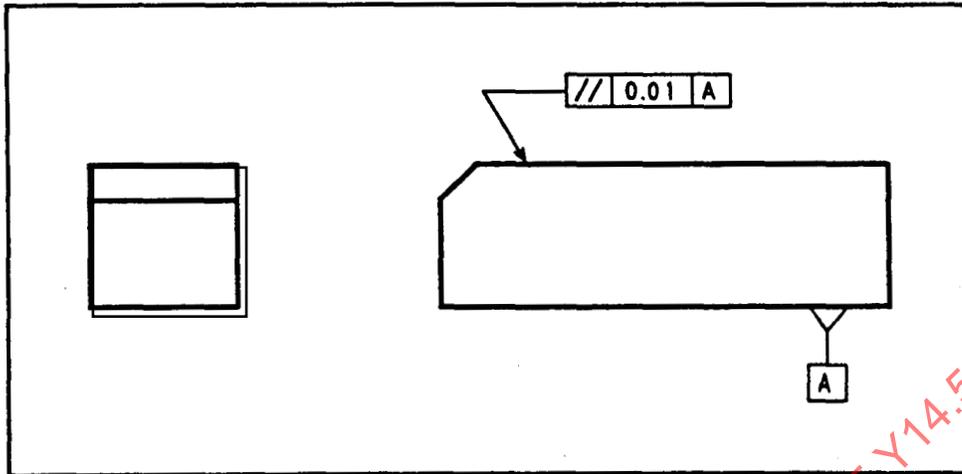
PLANAR PARALLELISM OF A PLANE; PRIMARY DATUM PLANE; NO SECONDARY DATUM SPECIFIED. A SECONDARY DATUM WOULD PROVIDE NO ADDITIONAL CONTROL
